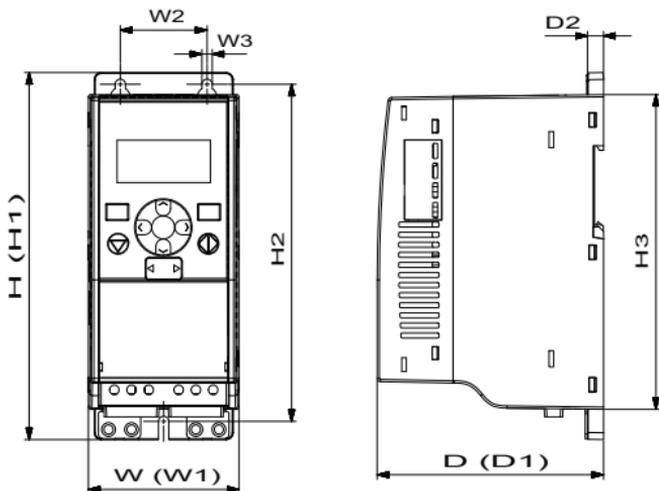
Vacon 20 dimensions, MI1 - MI3
